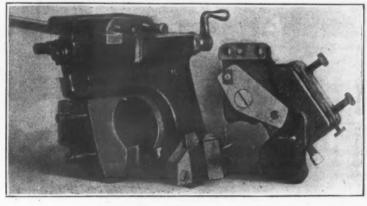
The Taper Turning Tool with the Back Rest Removed.
